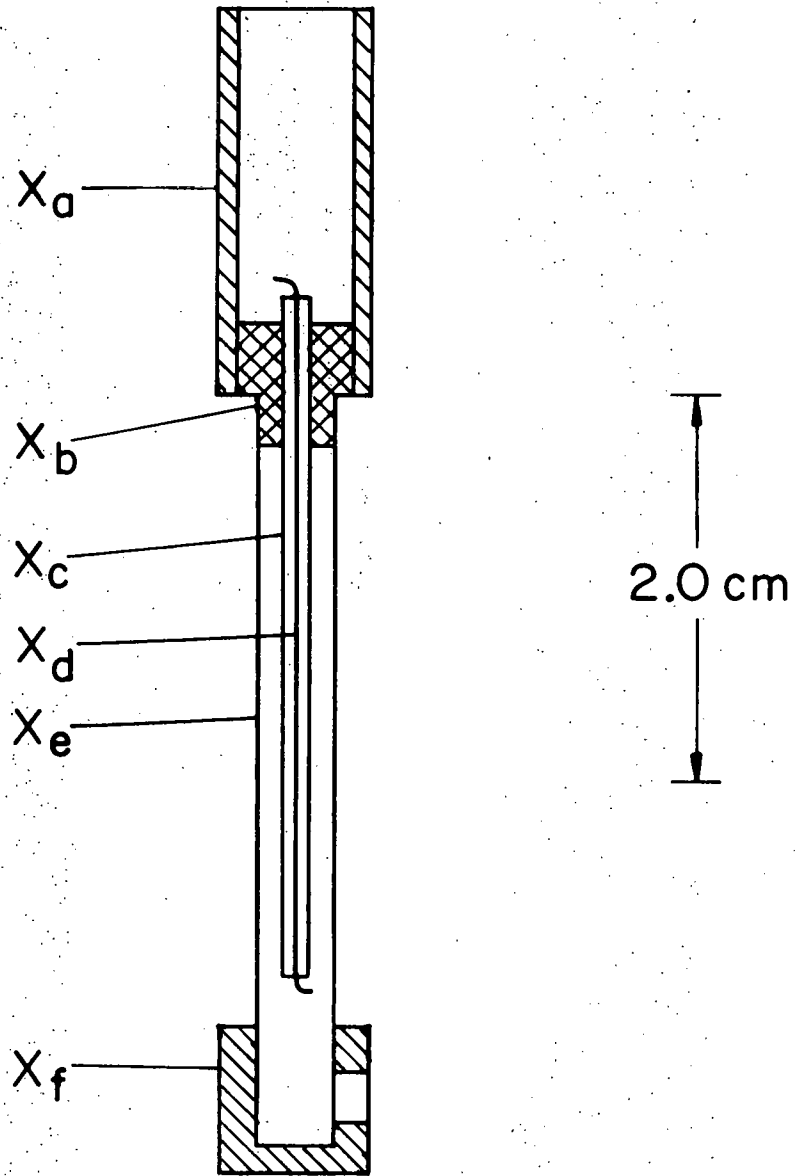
Cross section sketch of impedance tube. See text for dimensions. (X_a) base of needle valve; (X_b) copper plug; (X_c) cupronickel capillary tube; (X_d) chromel wire; (X_e) stainless steel shield tube; (X_f) copper nozzle. All parts soft soldered together except chromel wire left loose.
